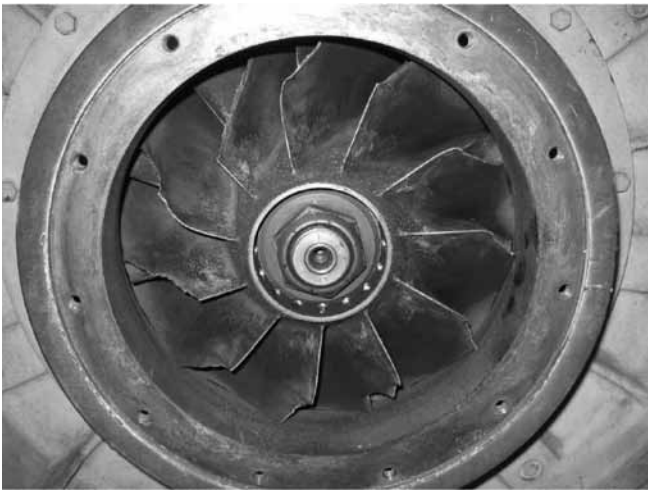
Impeller damaged due to foreign material ingestion
